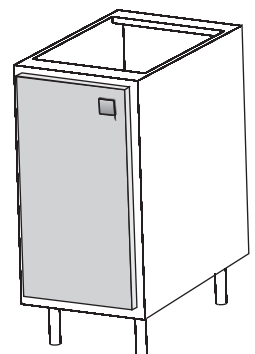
FACE FRAME DOOR - SKILLED INSTALLATION
